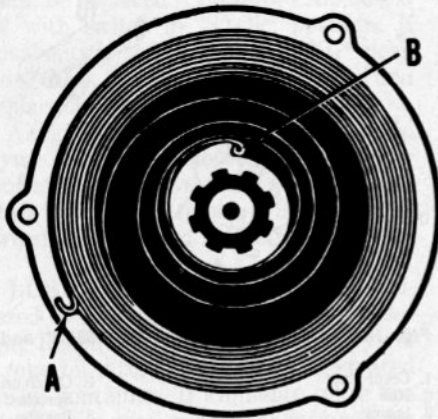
View of rewind spring installation in starter cover. Hook outer loop (A) of spring in notch as shown. Inner loop (B) of spring must be curved inward to engage notch of spring lock.
